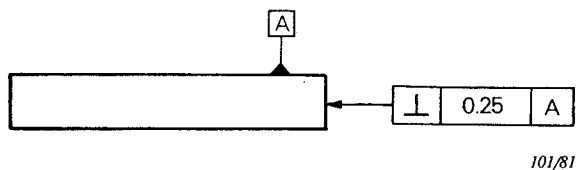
The surface on which the tolerance is given should be contained between two surfaces 0.25 apart and perpendicular to the reference plane A.
